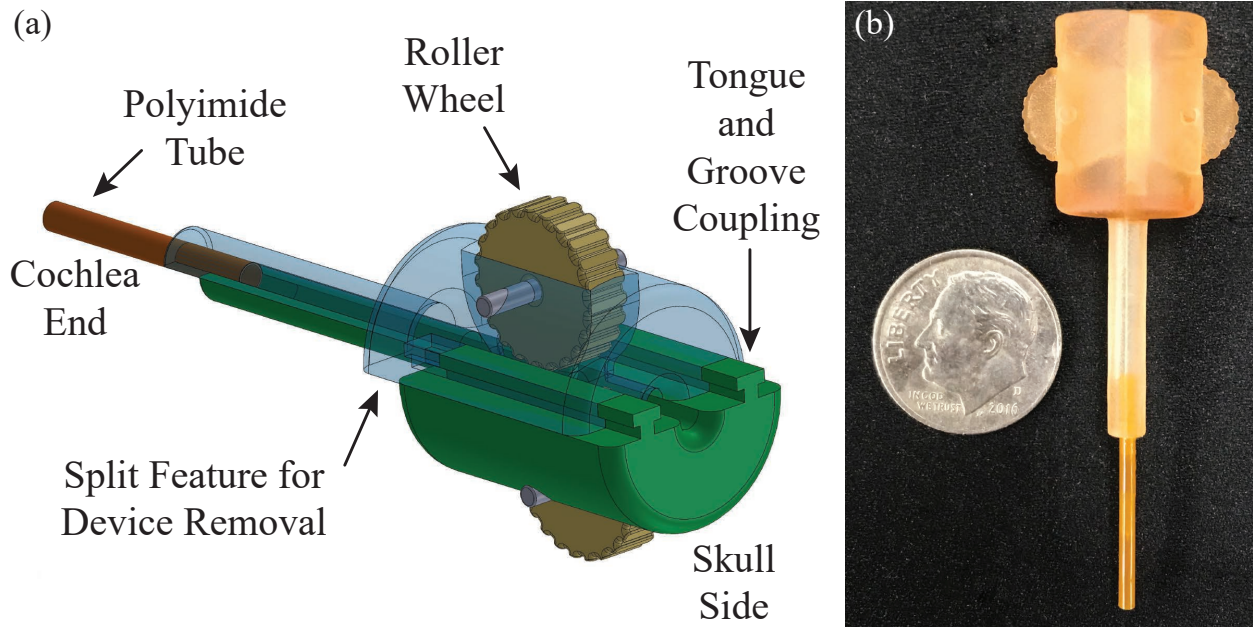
(a) Second generation tool design and (b) Assembled device with autoclavable 3D printed pieces and US dime for scale (diameter of 17.91 mm)
